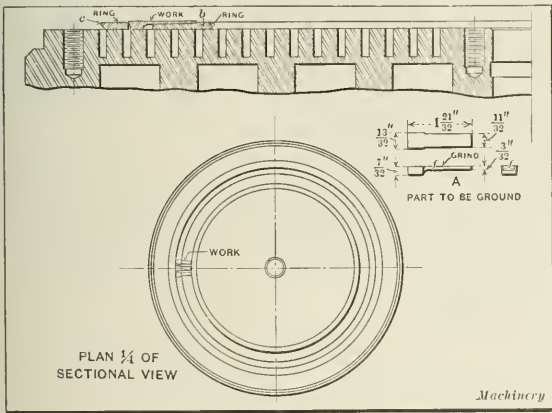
Fixture used for holding Bolt Stop Springs for Military Rifles
